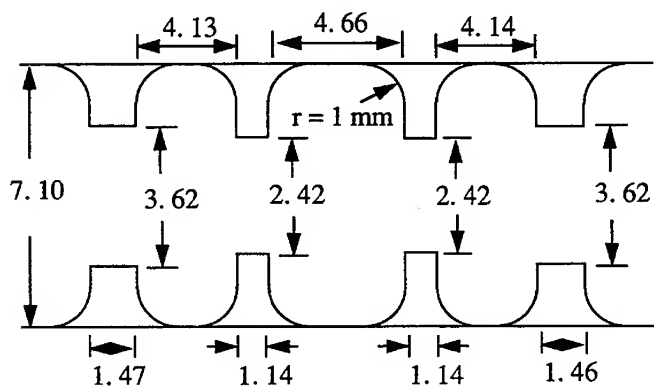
Filter Geometry with Manufactured Dimensions (in mms)
